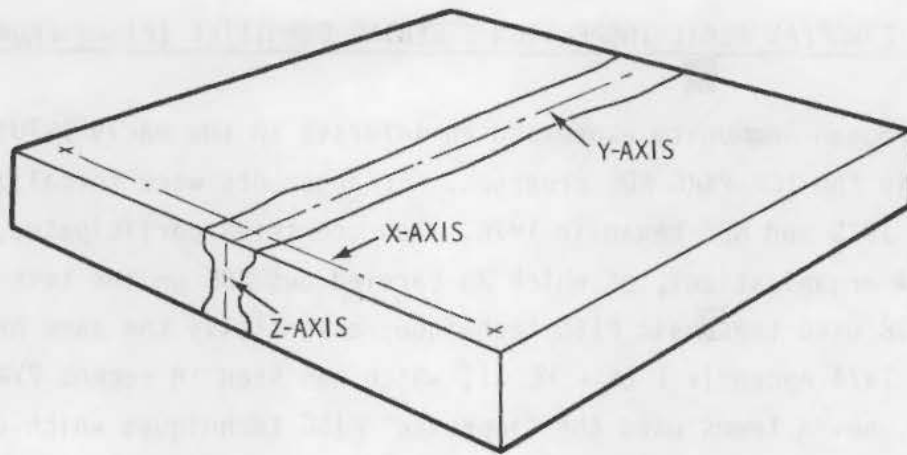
PVRC Weld Specimen 50-52
